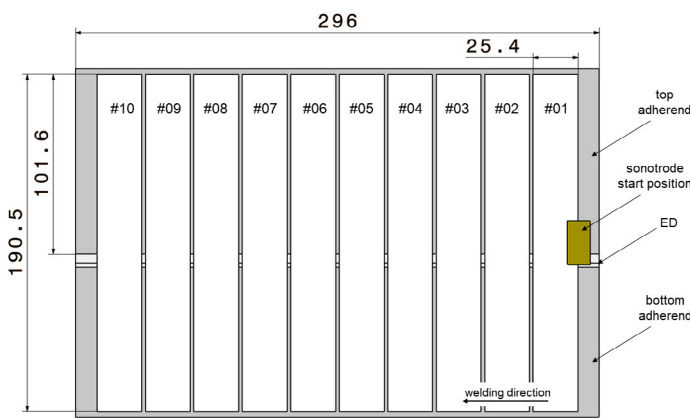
SLS coupon arrangement across top and bottom adherend weld configuration.
